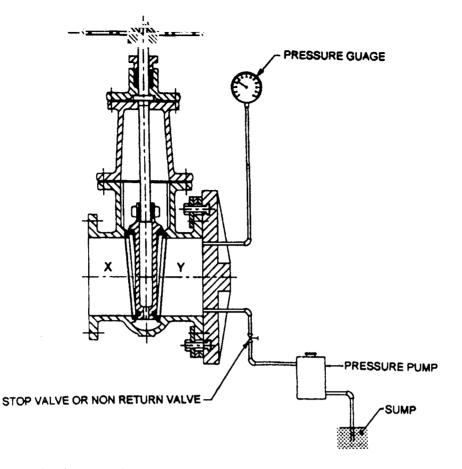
TYPICAL VALVE TESTING ARRANGEMENT FOR OPEN-END TEST
